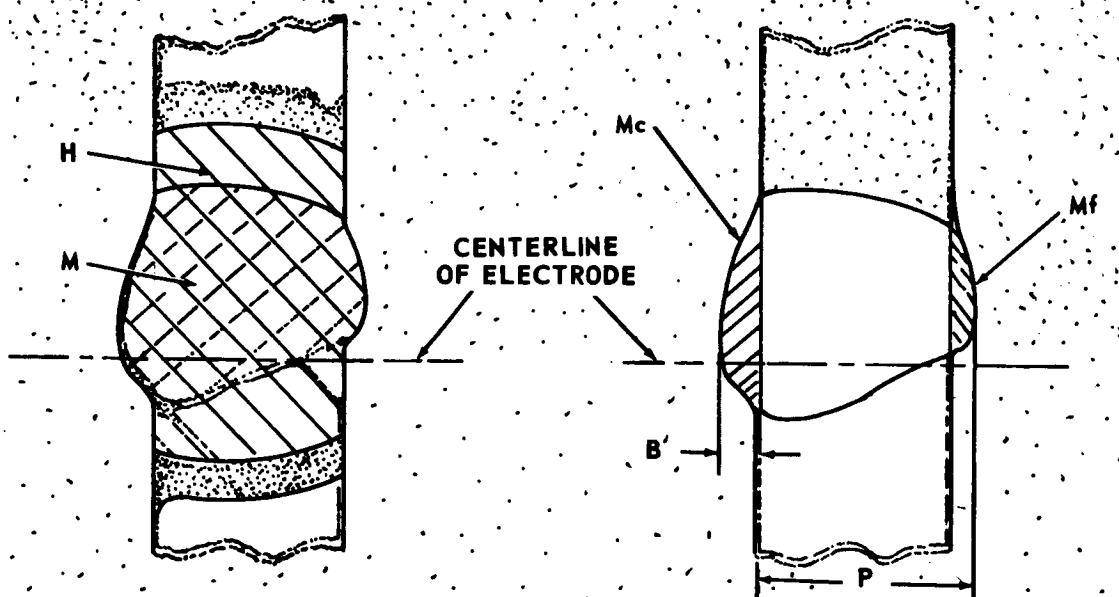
ILLUSTRATED DEFINITIONS OF VARIABLES RELATED TO WELD CROSS SECTION AND PENETRATION
